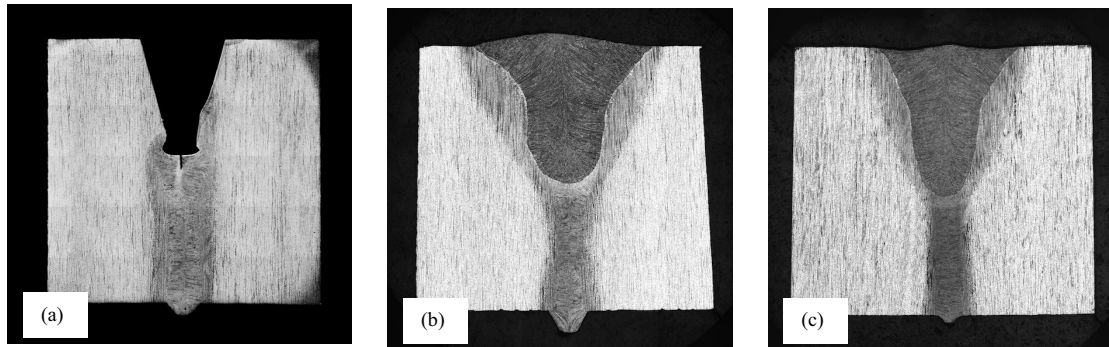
(a) The root pass, (b) the complete two-pass weld, and (c) the modified weld using low-speed laser cutting as preparation method.
